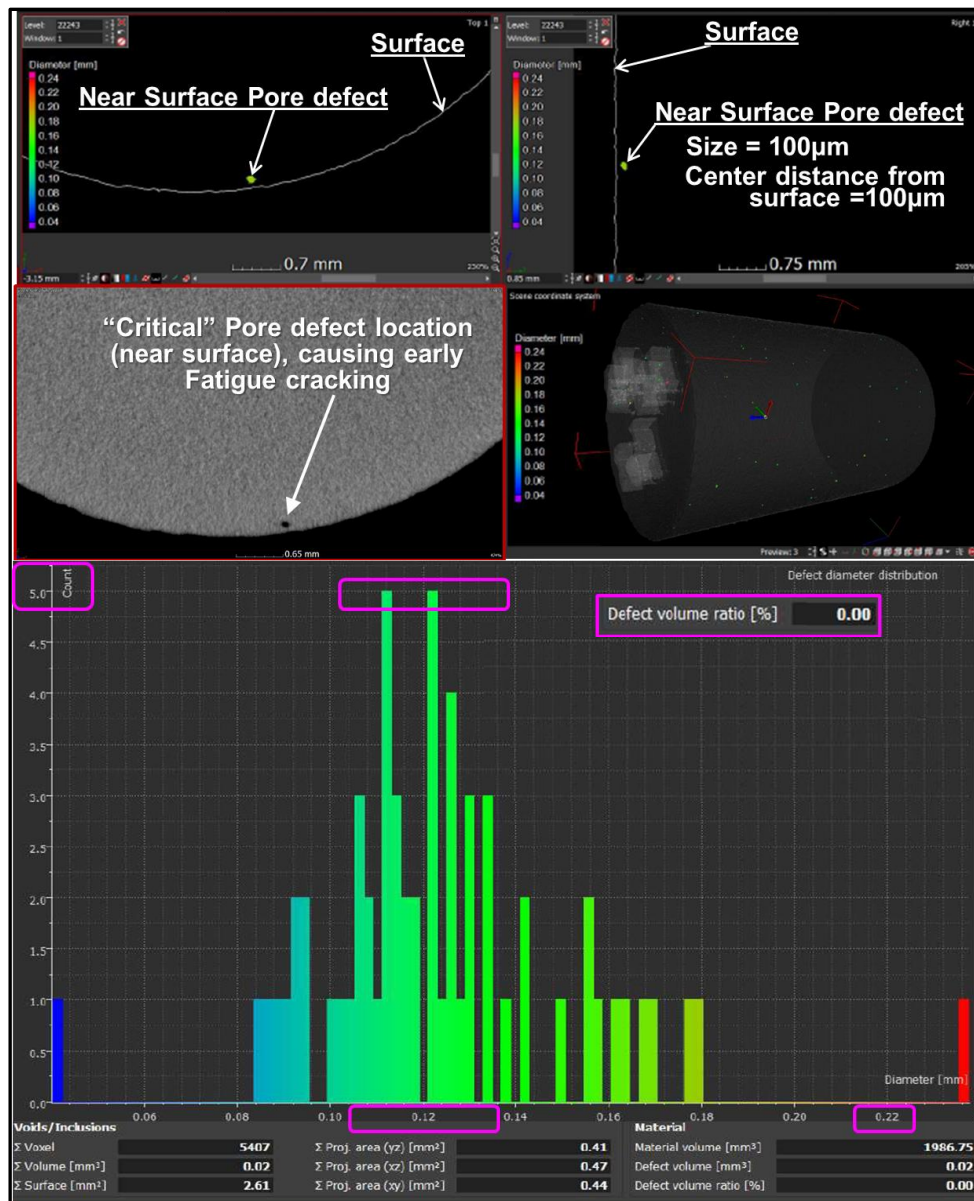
Tray #1 Specimen (No-HIP) Micro-CT inspection results (defect size per count & location)
